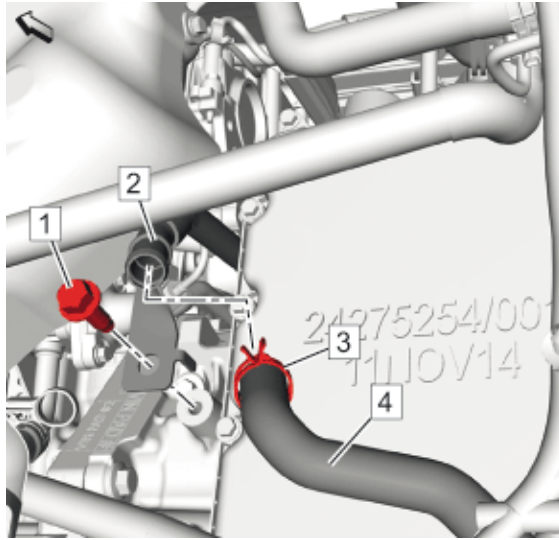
Heater Water Auxiliary Pump Inlet Hose, Clamp, Heater Water Shutoff Valve Inlet Hose Bracket And Bolt
